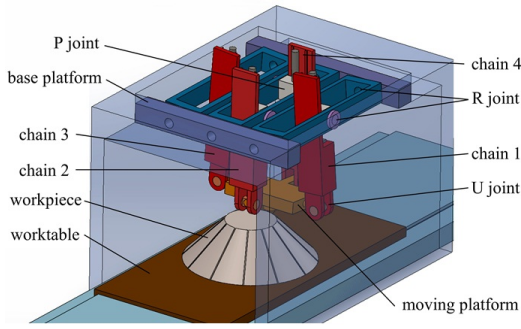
3D model of a hybrid equipment for friction stir welding.
